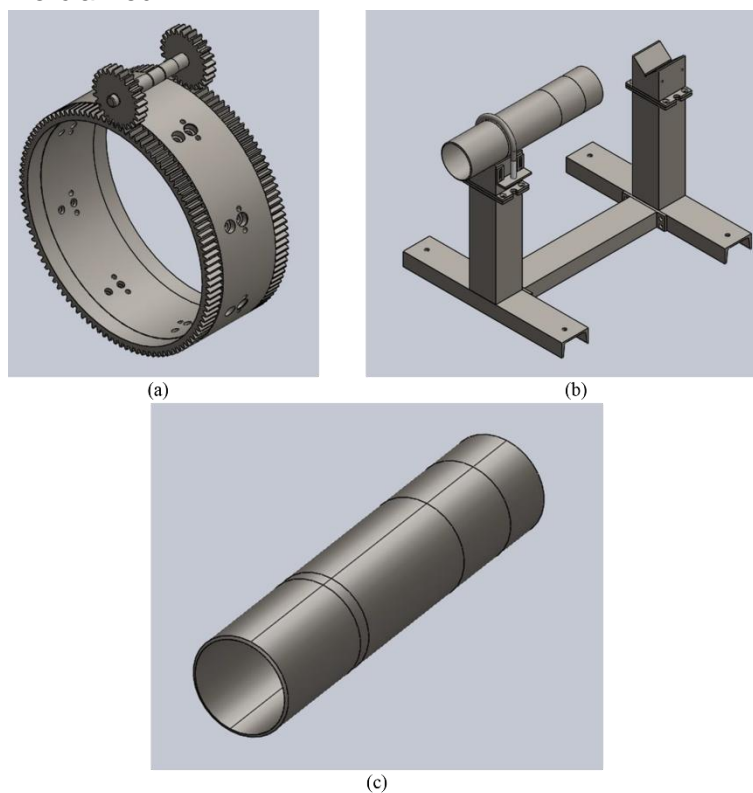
Base design part of (a) gear, (b) when the pipe is installed and (c) the pipe
